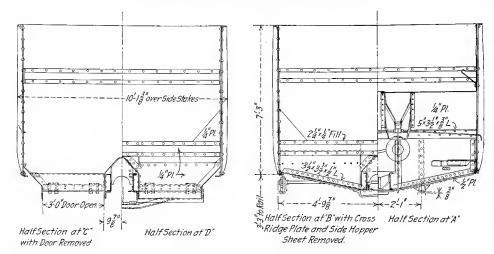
Cross Sections of Pennsylvania All-Steel Hopper Car Shown in Figs. 301 and 303.
